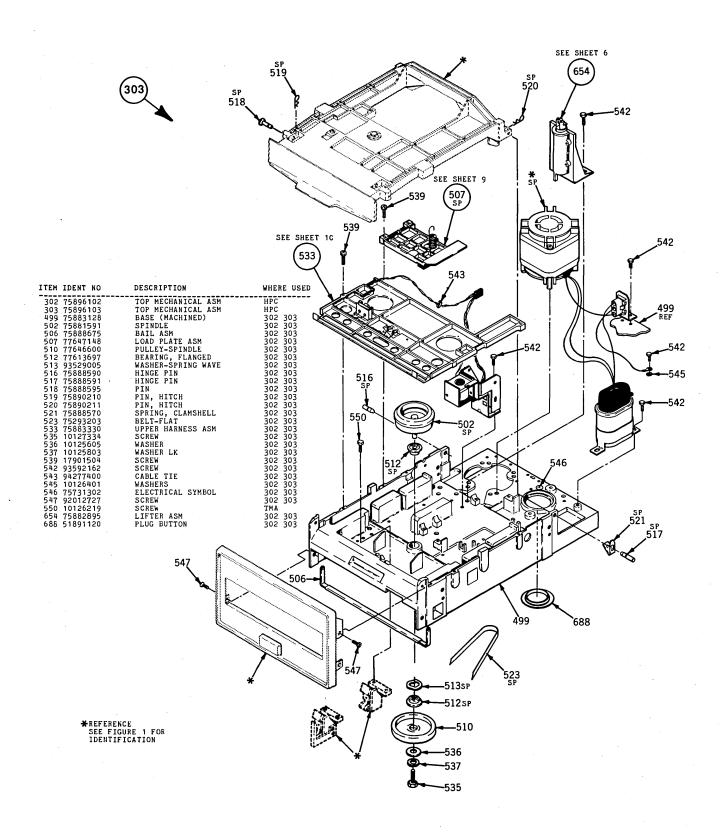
TOP MECHANICAL ASSEMBLY (Sheet 1 of 2)
